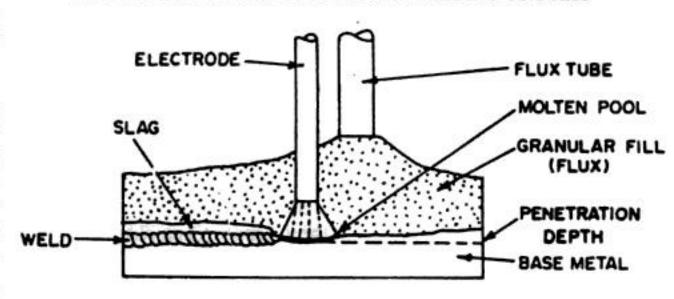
SUBMERGED ARC WELDING PROCESS.
